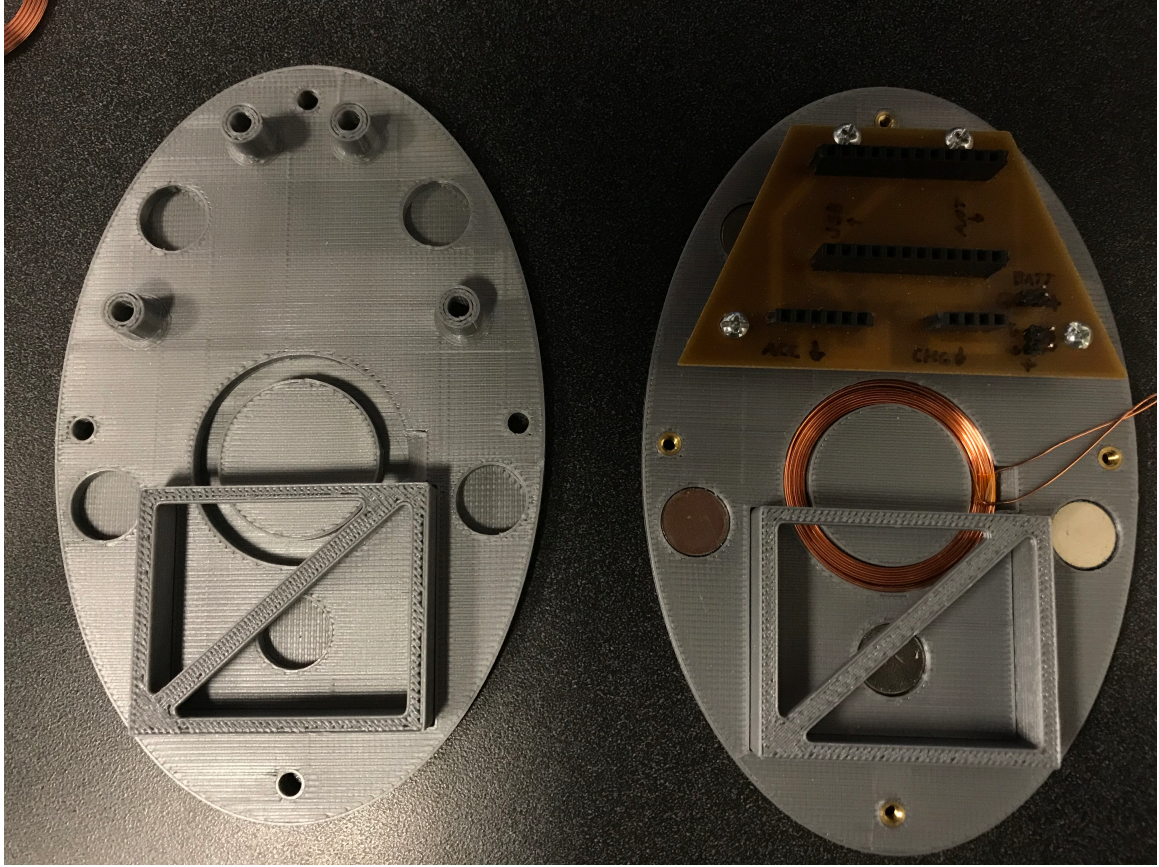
[Left] WASP baseplate assembly with battery gate installed. [Right] WASP baseplate assembly with heat-set threaded inserts, inductive coil, magnets, and custom printed circuit board (PCB).
